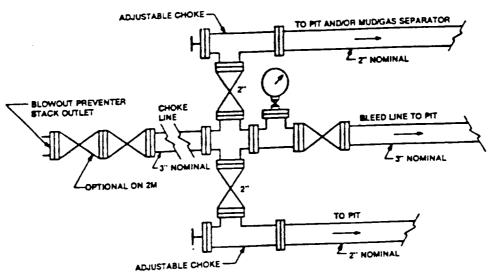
Typical choke manifold assembly for 2M and 3M rated working pressure service — surface installation.
